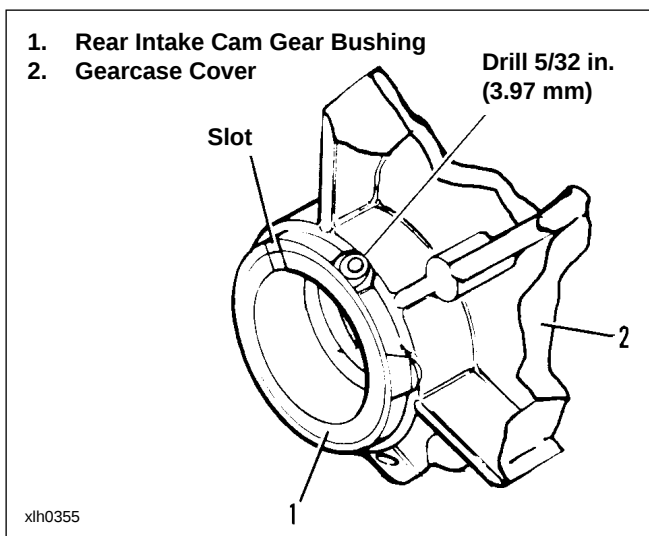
Rear Intake Cam Gear Bushing Installed in Gearcase Cover
